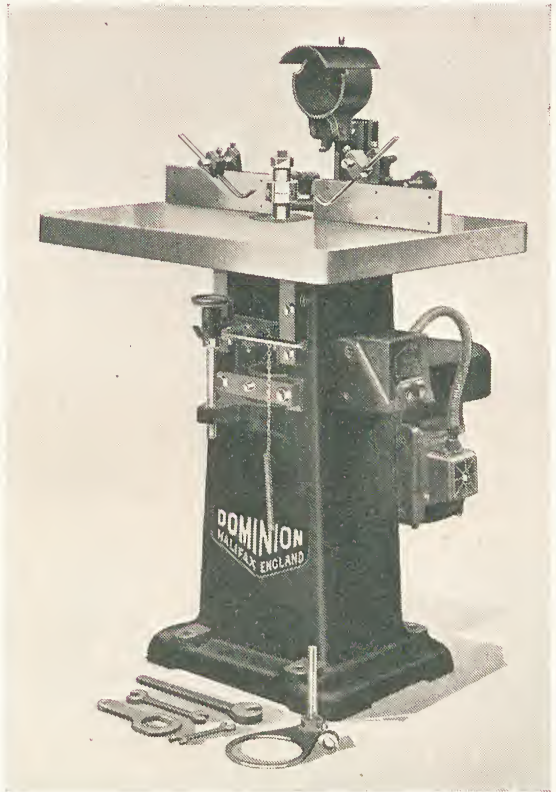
Dominion "BL" spindle moulder for motor or belt drive.
